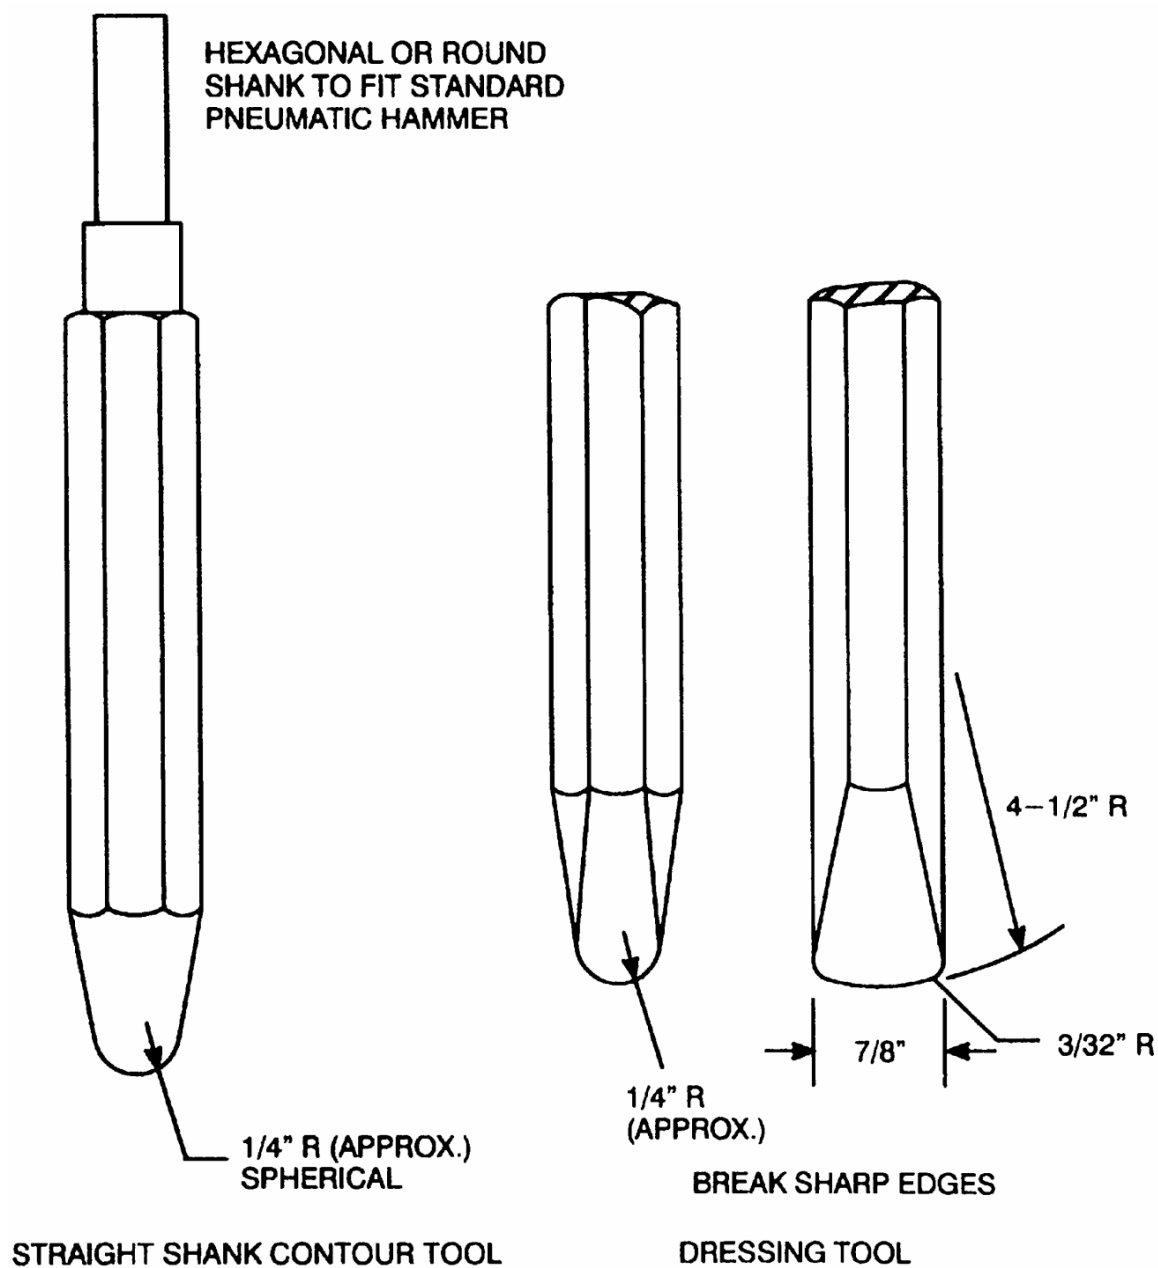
SUGGESTED MECHANICAL PEENING TOOLS.
